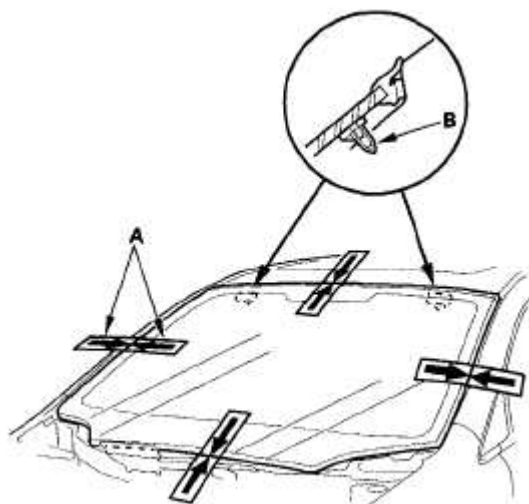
Making Alignment Marks Across Windshield And Body With Grease Pencil
